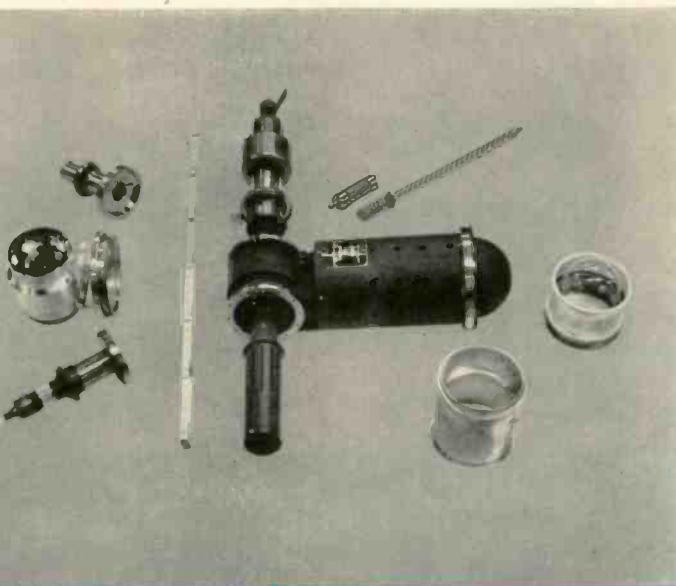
Typical sealed-off WL-6285 magnetron. The component parts that make up the tube are also shown.
